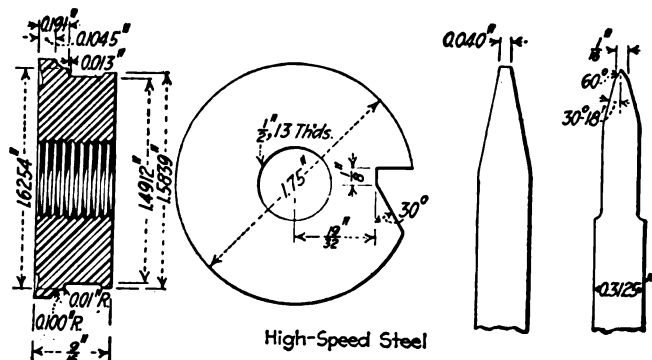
THE TOOLS USED FOR TURNING AND FORMING ANVIL
